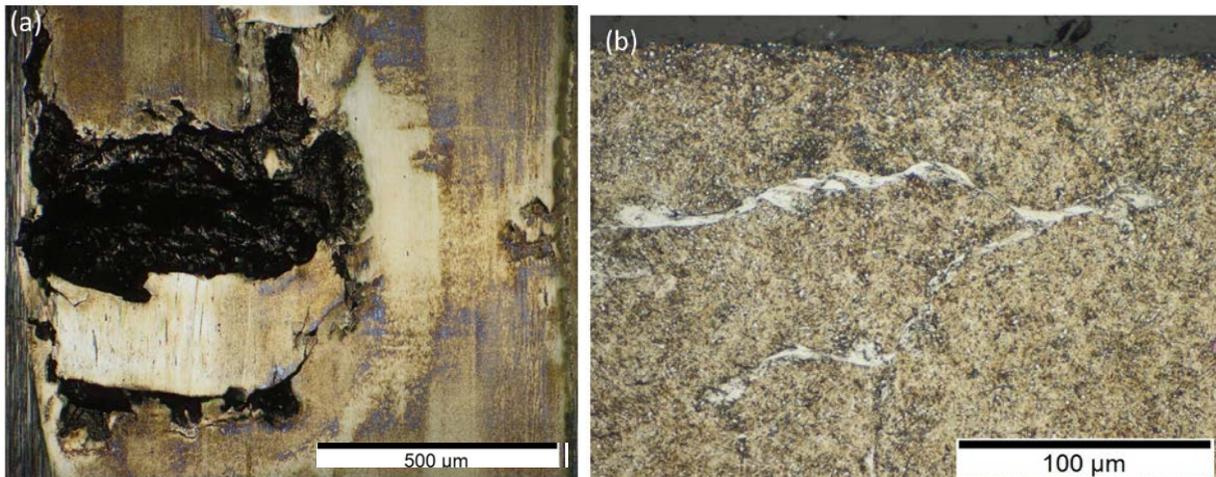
Benchtop test sample roller post-test; top view of roller race with spall (a) and circumferential cross section etched showing WECs (b) [5]
